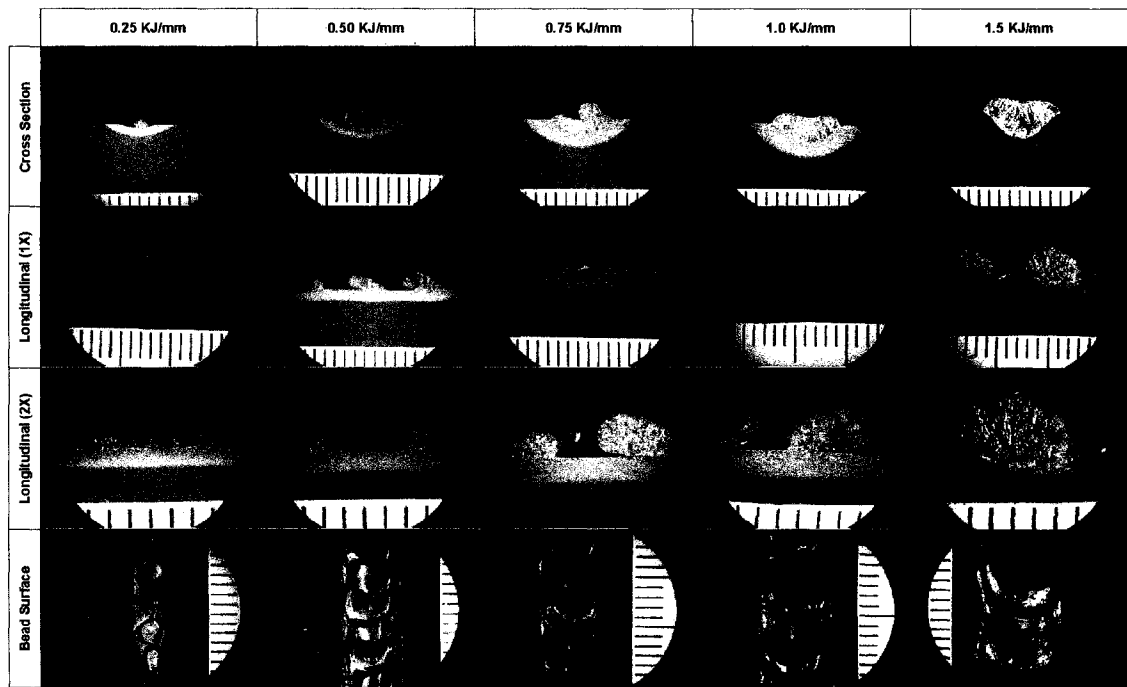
Macro-Images of Run G: Welds G1 to G5
